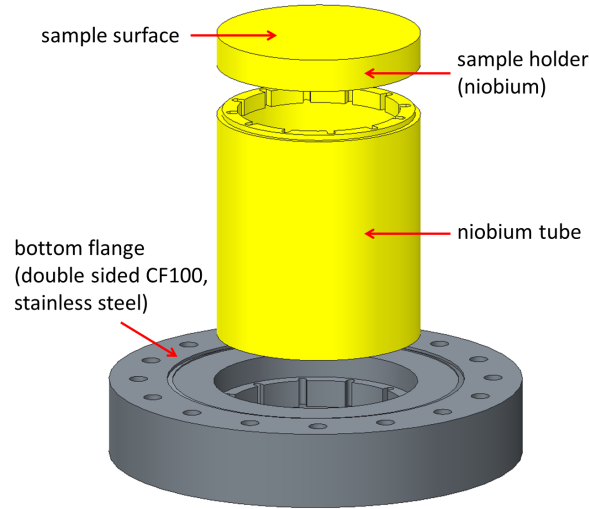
Exploded view of the demountable calorimetry chamber.
